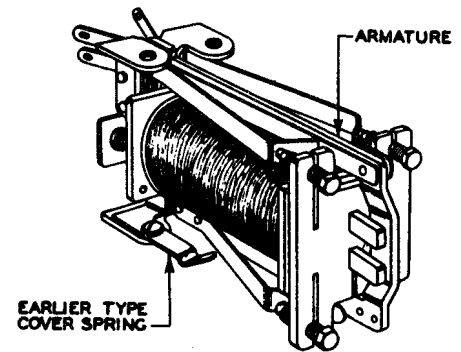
J-type Relay Equipped With Earlier Type Cover Spring
